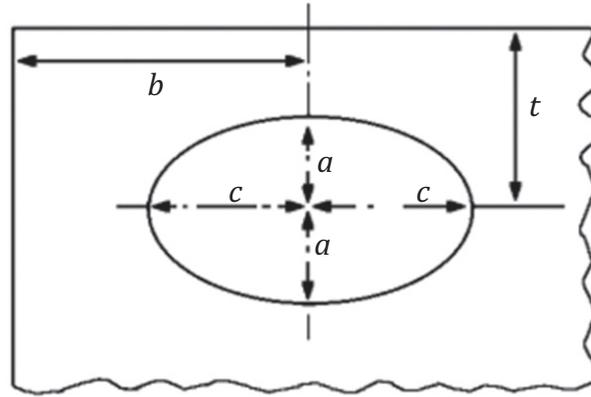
Dimensions of a crack, tb = distance to nearest surface
